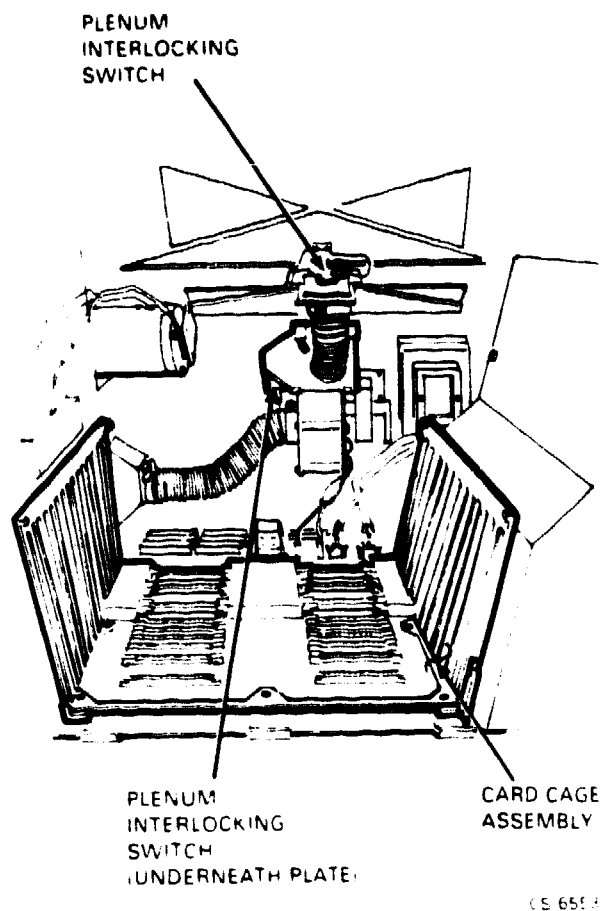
Plenum Interlock Switches Located above the Card Cage at the Rear of the Printer
